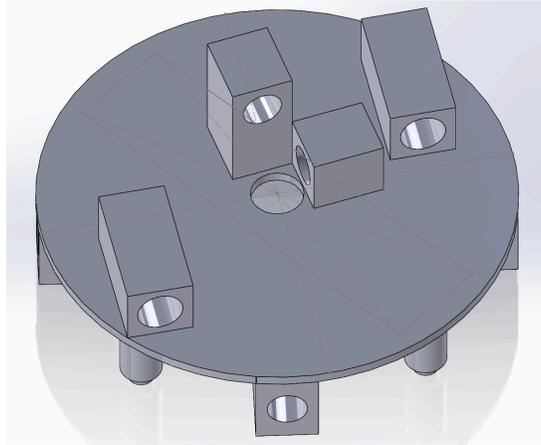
Top isometric view of 3D CAD solenoid layer design
